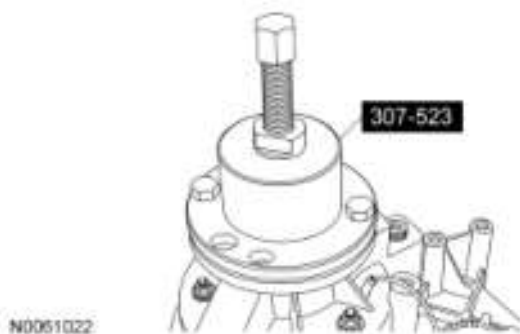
Removing Output Flange Using Special Tool (307-523)
